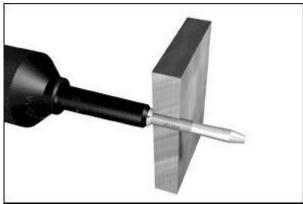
Cold Expansion Process. Mandrel and Sleeve Inserted in the Hole (Fatigue Technology 2011)
